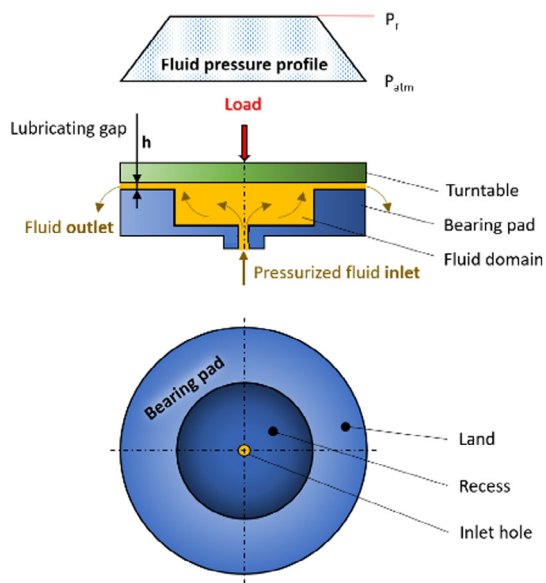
Scheme of the open-type hydrostatic bearing pad and fluid pressure distribution.
